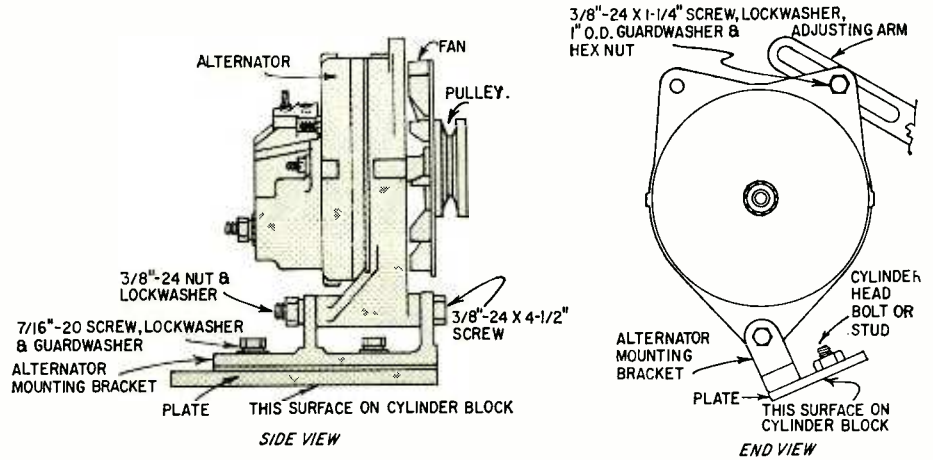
Two sketches showing how an alternator is mounted in a car.
